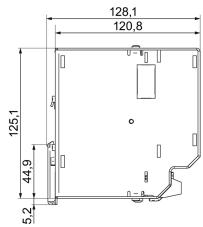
Dimension drawing for 6EP1337-3BA00
